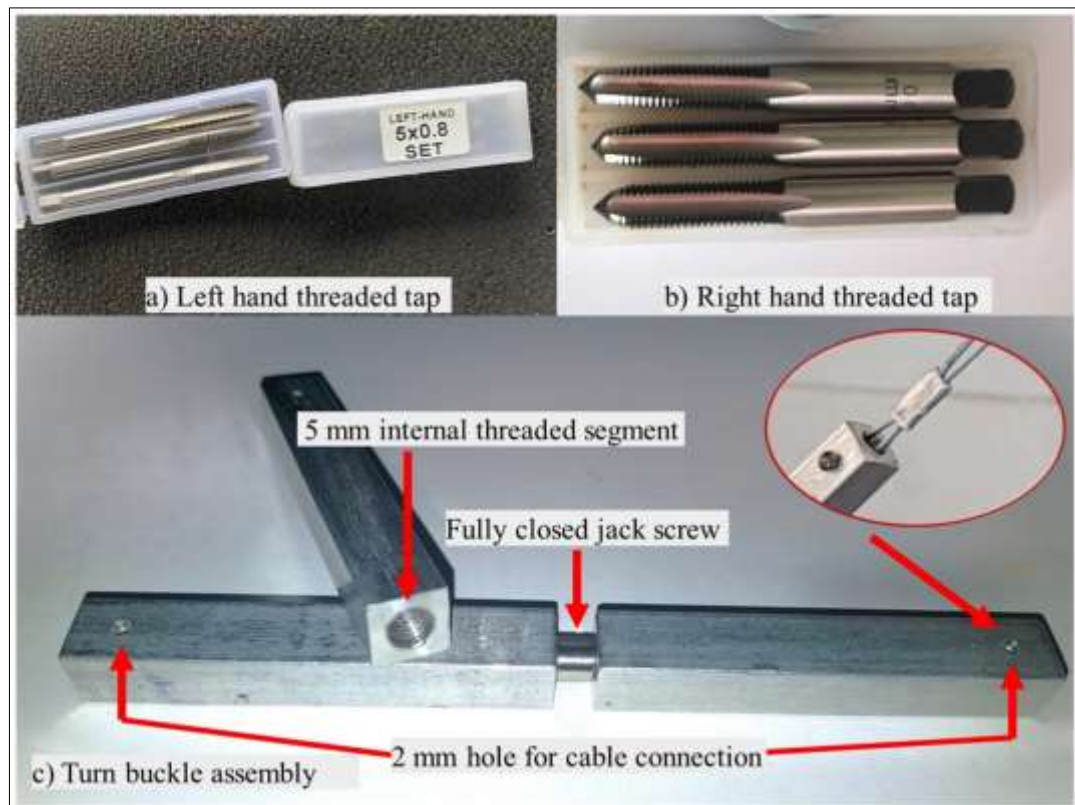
Photo illustrating internal left and right threading and assembly of end joints
